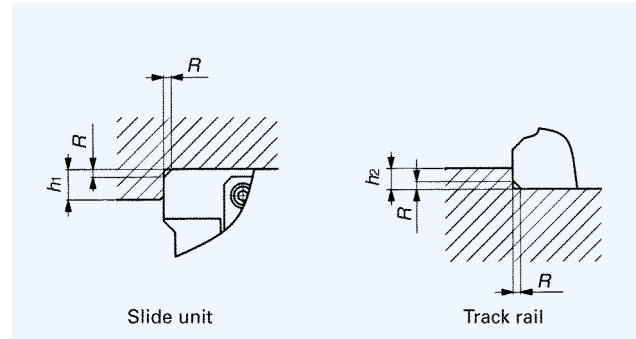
Relieved fillet at the corner of the mating reference mounting surfaces
